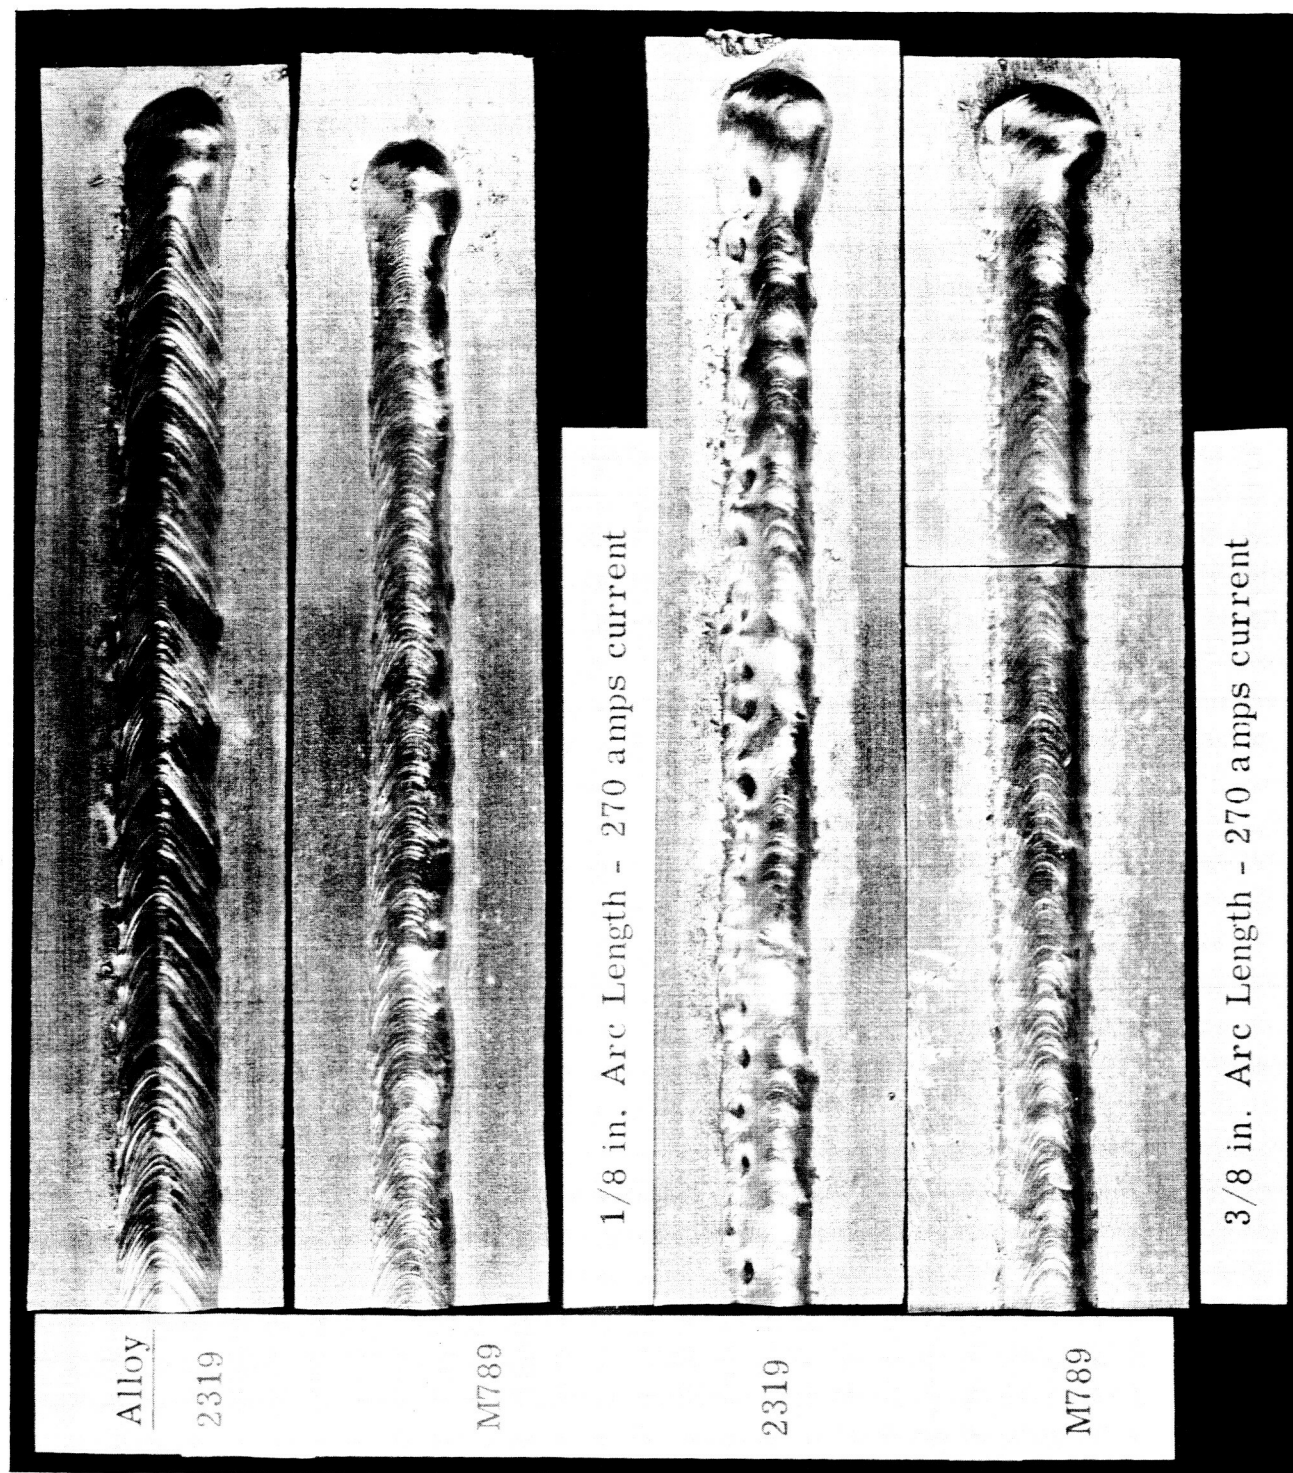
Photograph of weld beads deposited by 2319 and M789 (2319 + 1.0 Zn) fillers in the horizontal position
